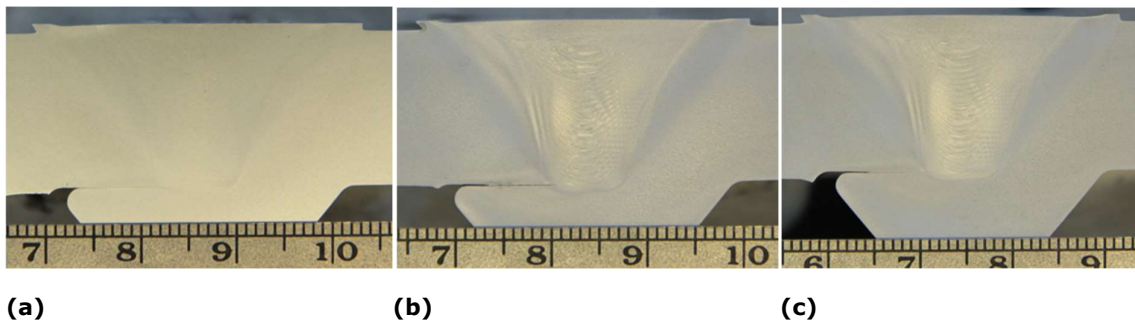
0_Gap_23mm weld macrography at (a) start, (b) middle, and (c) end
